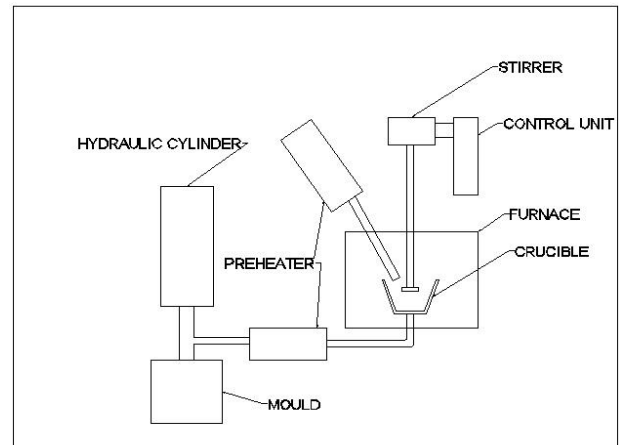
Schematic view of setup for Fabrication of AMC through squeeze casting technique
